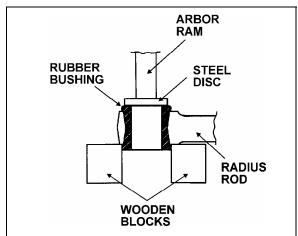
RADIUS ROD BUSHING REMOVAL
